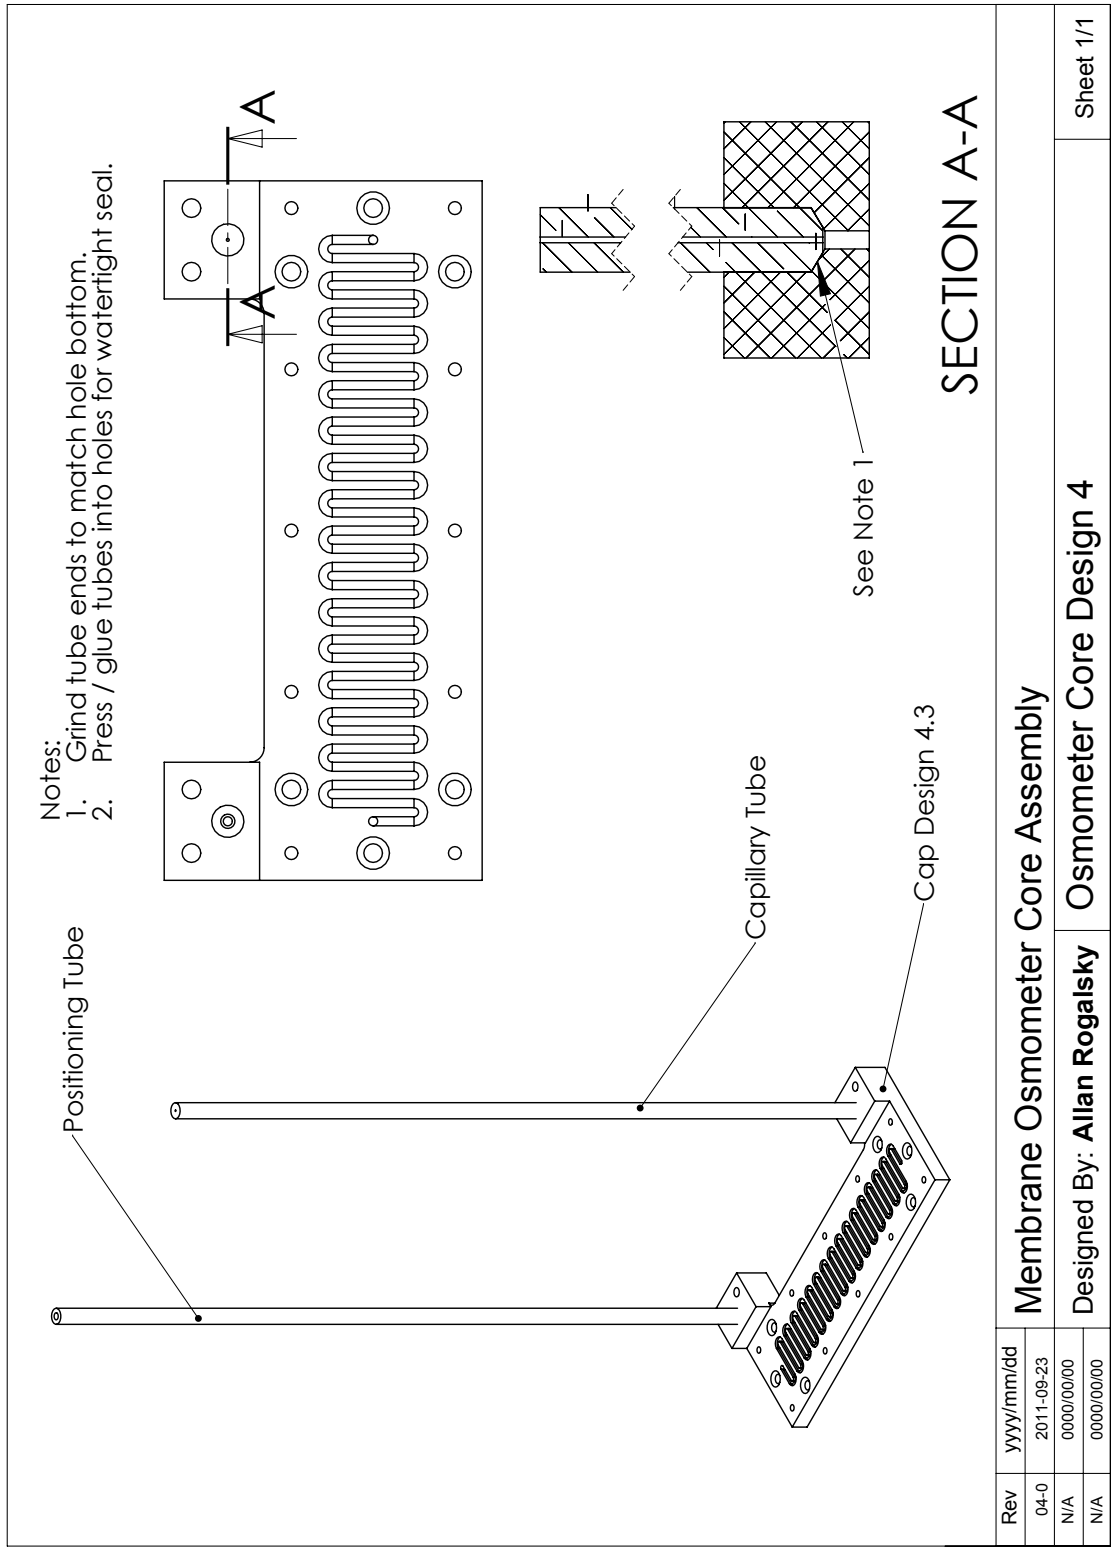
Osmometer Top Level 4.0 / Core Assembly
